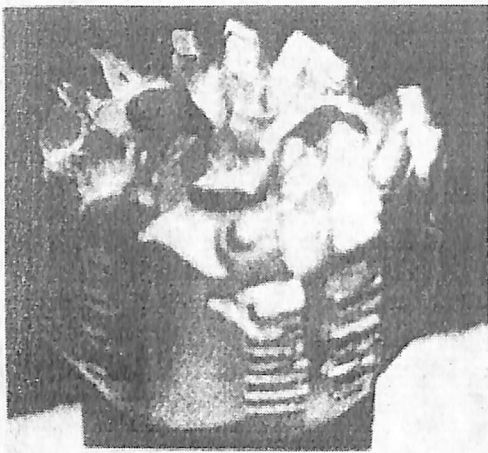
To combat sideloading wear, rolling cone bits should be specified to have more durable heel row insert shapes, more gauge inserts and shirrtail hardfacing.
